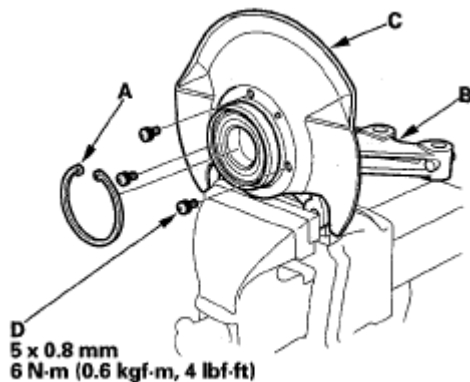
Identifying Knuckle Snap Ring With Torque Specification
